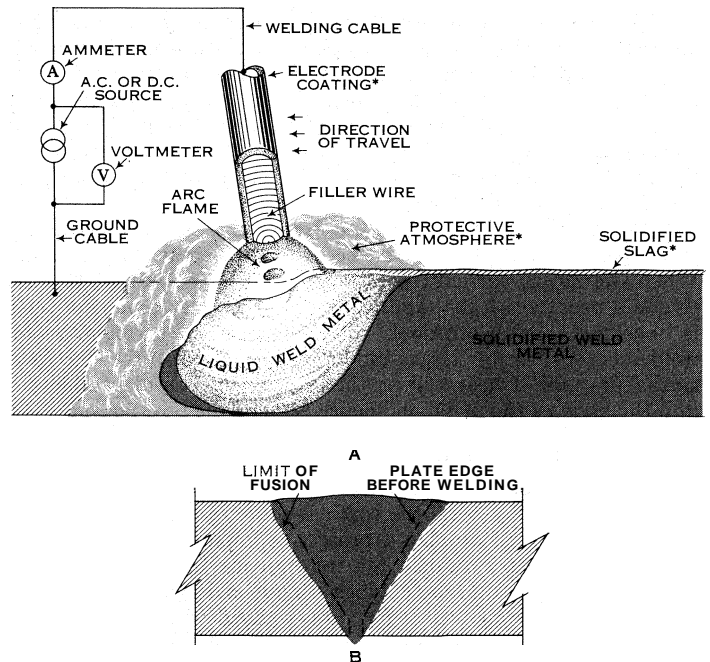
ARC WELDING WITH ROD ELECTRODES. (A) LONGITUDINAL SECTION THROUGH AN ARC WELD IN PROGRESS; (B) CROSS SECTION THROUGH COMPLETED WELD. COMPONENTS MARKED \* ARE NOT PRESENT IN SOME ARC-WELDING PROCESSES
